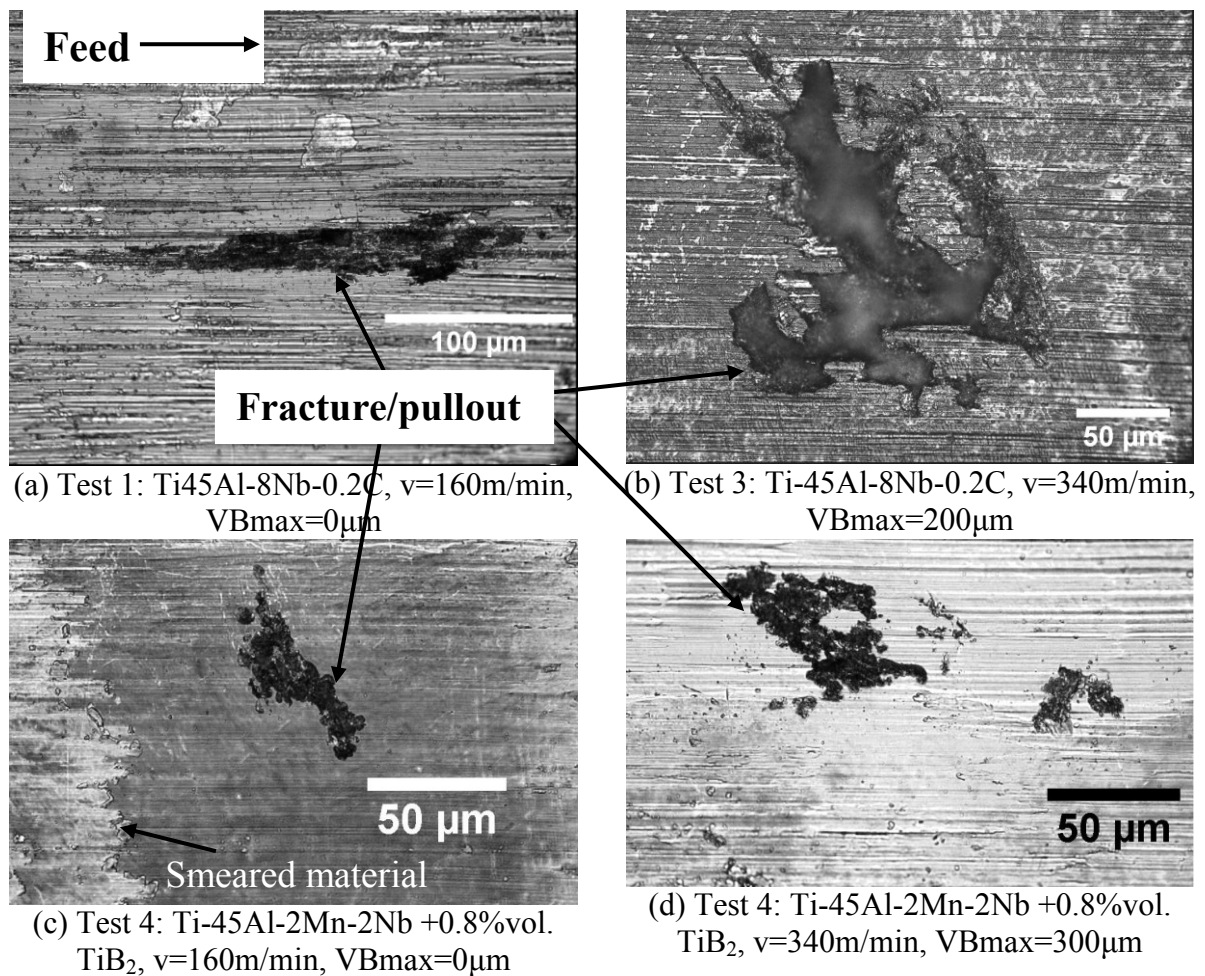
Images of machined workpiece surface (Phase 1B)
